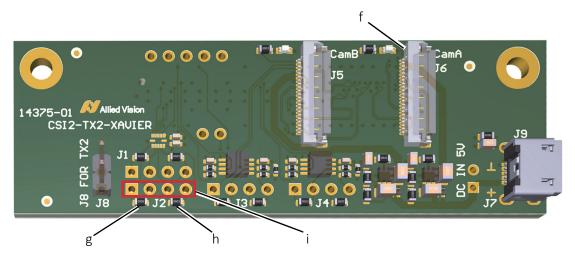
Desoldering resistors and soldering a pin header for Camera A
